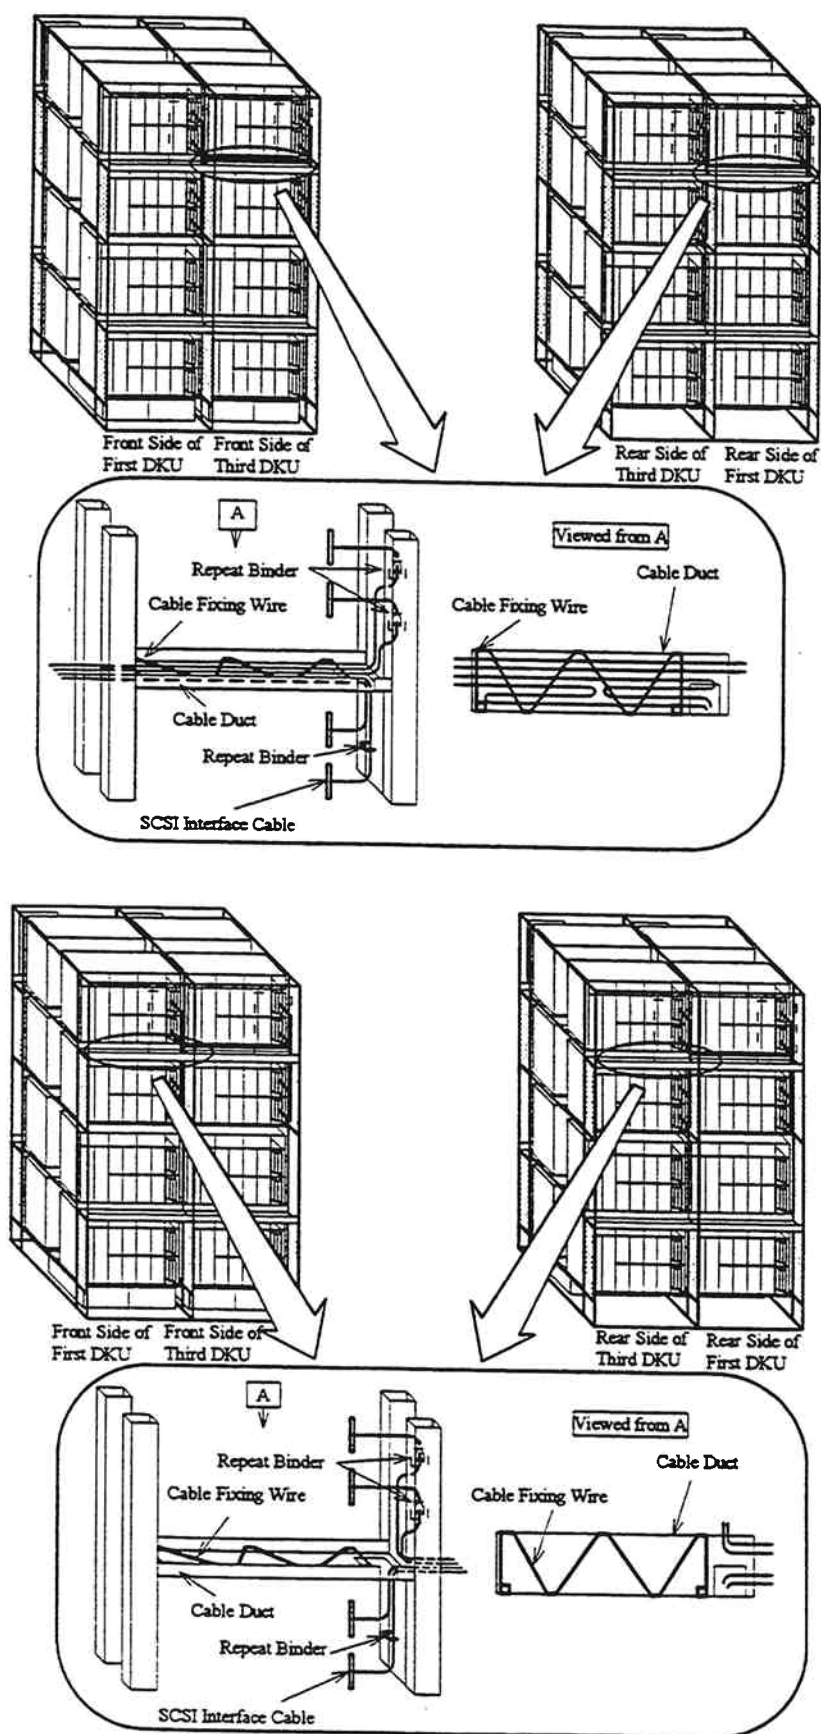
Removal of the SCSI Interface Cables
